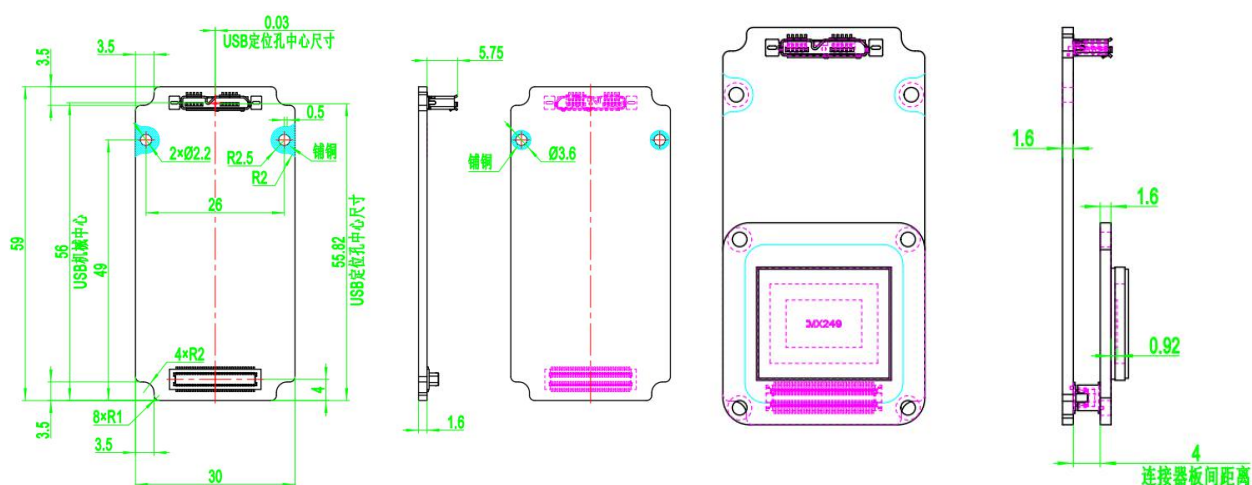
Dimensions of OEM2 circuit board (mm)
